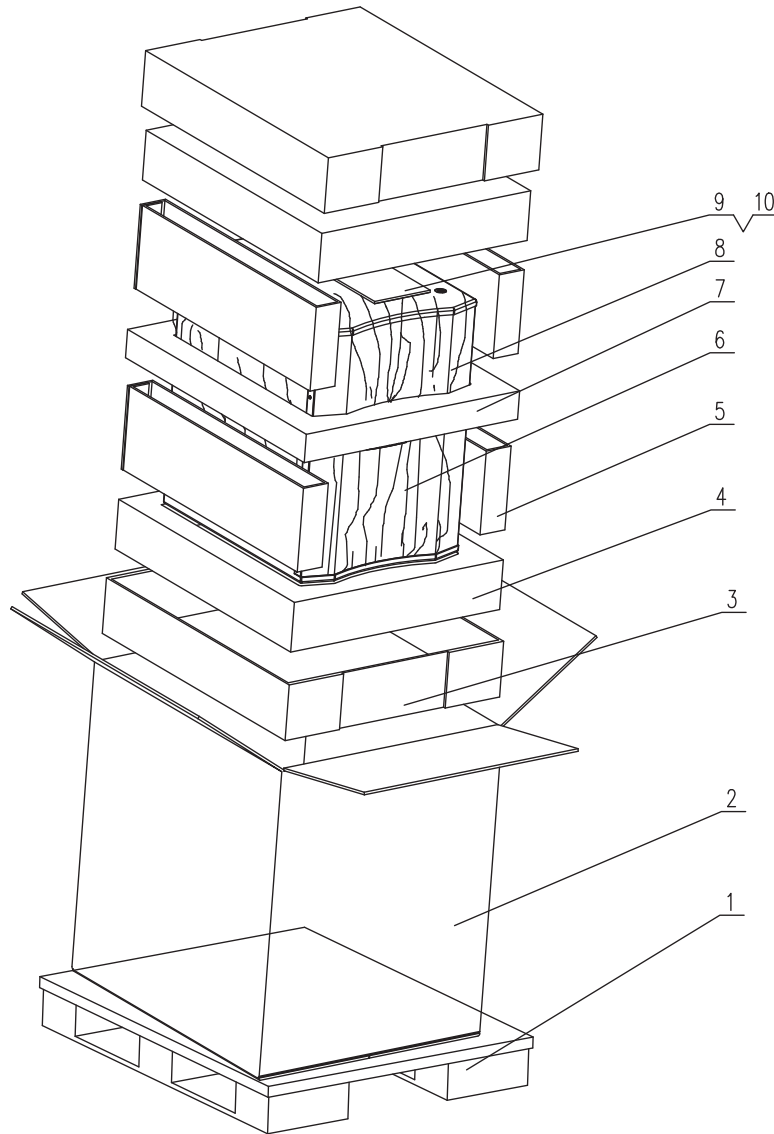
Panaray LT MB24 WR Bass Loudspeaker Packaging View
